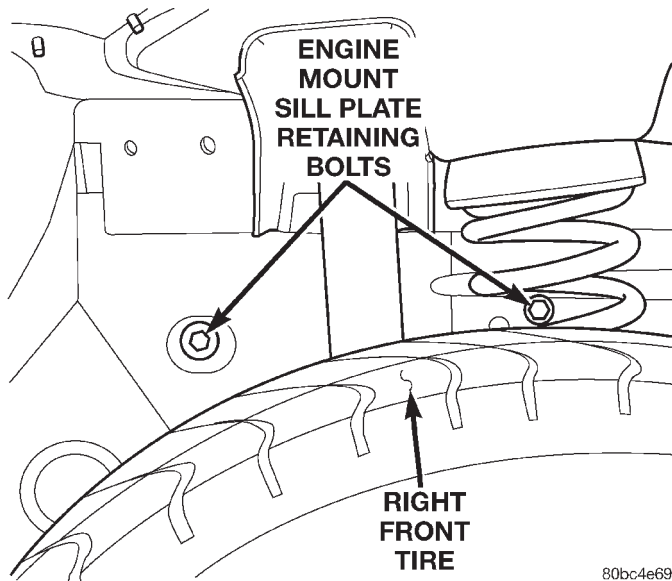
Engine Mount Sill Plate Bolts - Right Wheel Well
